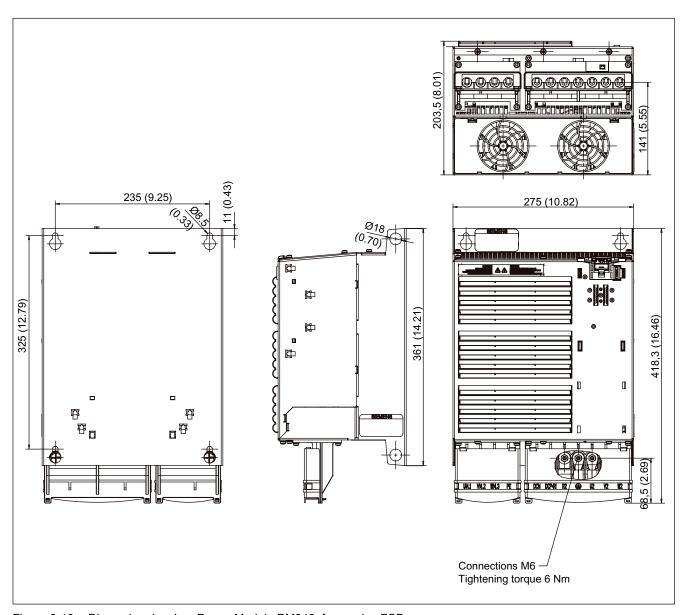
Dimension drawing: Power Module PM340, frame size FSD
